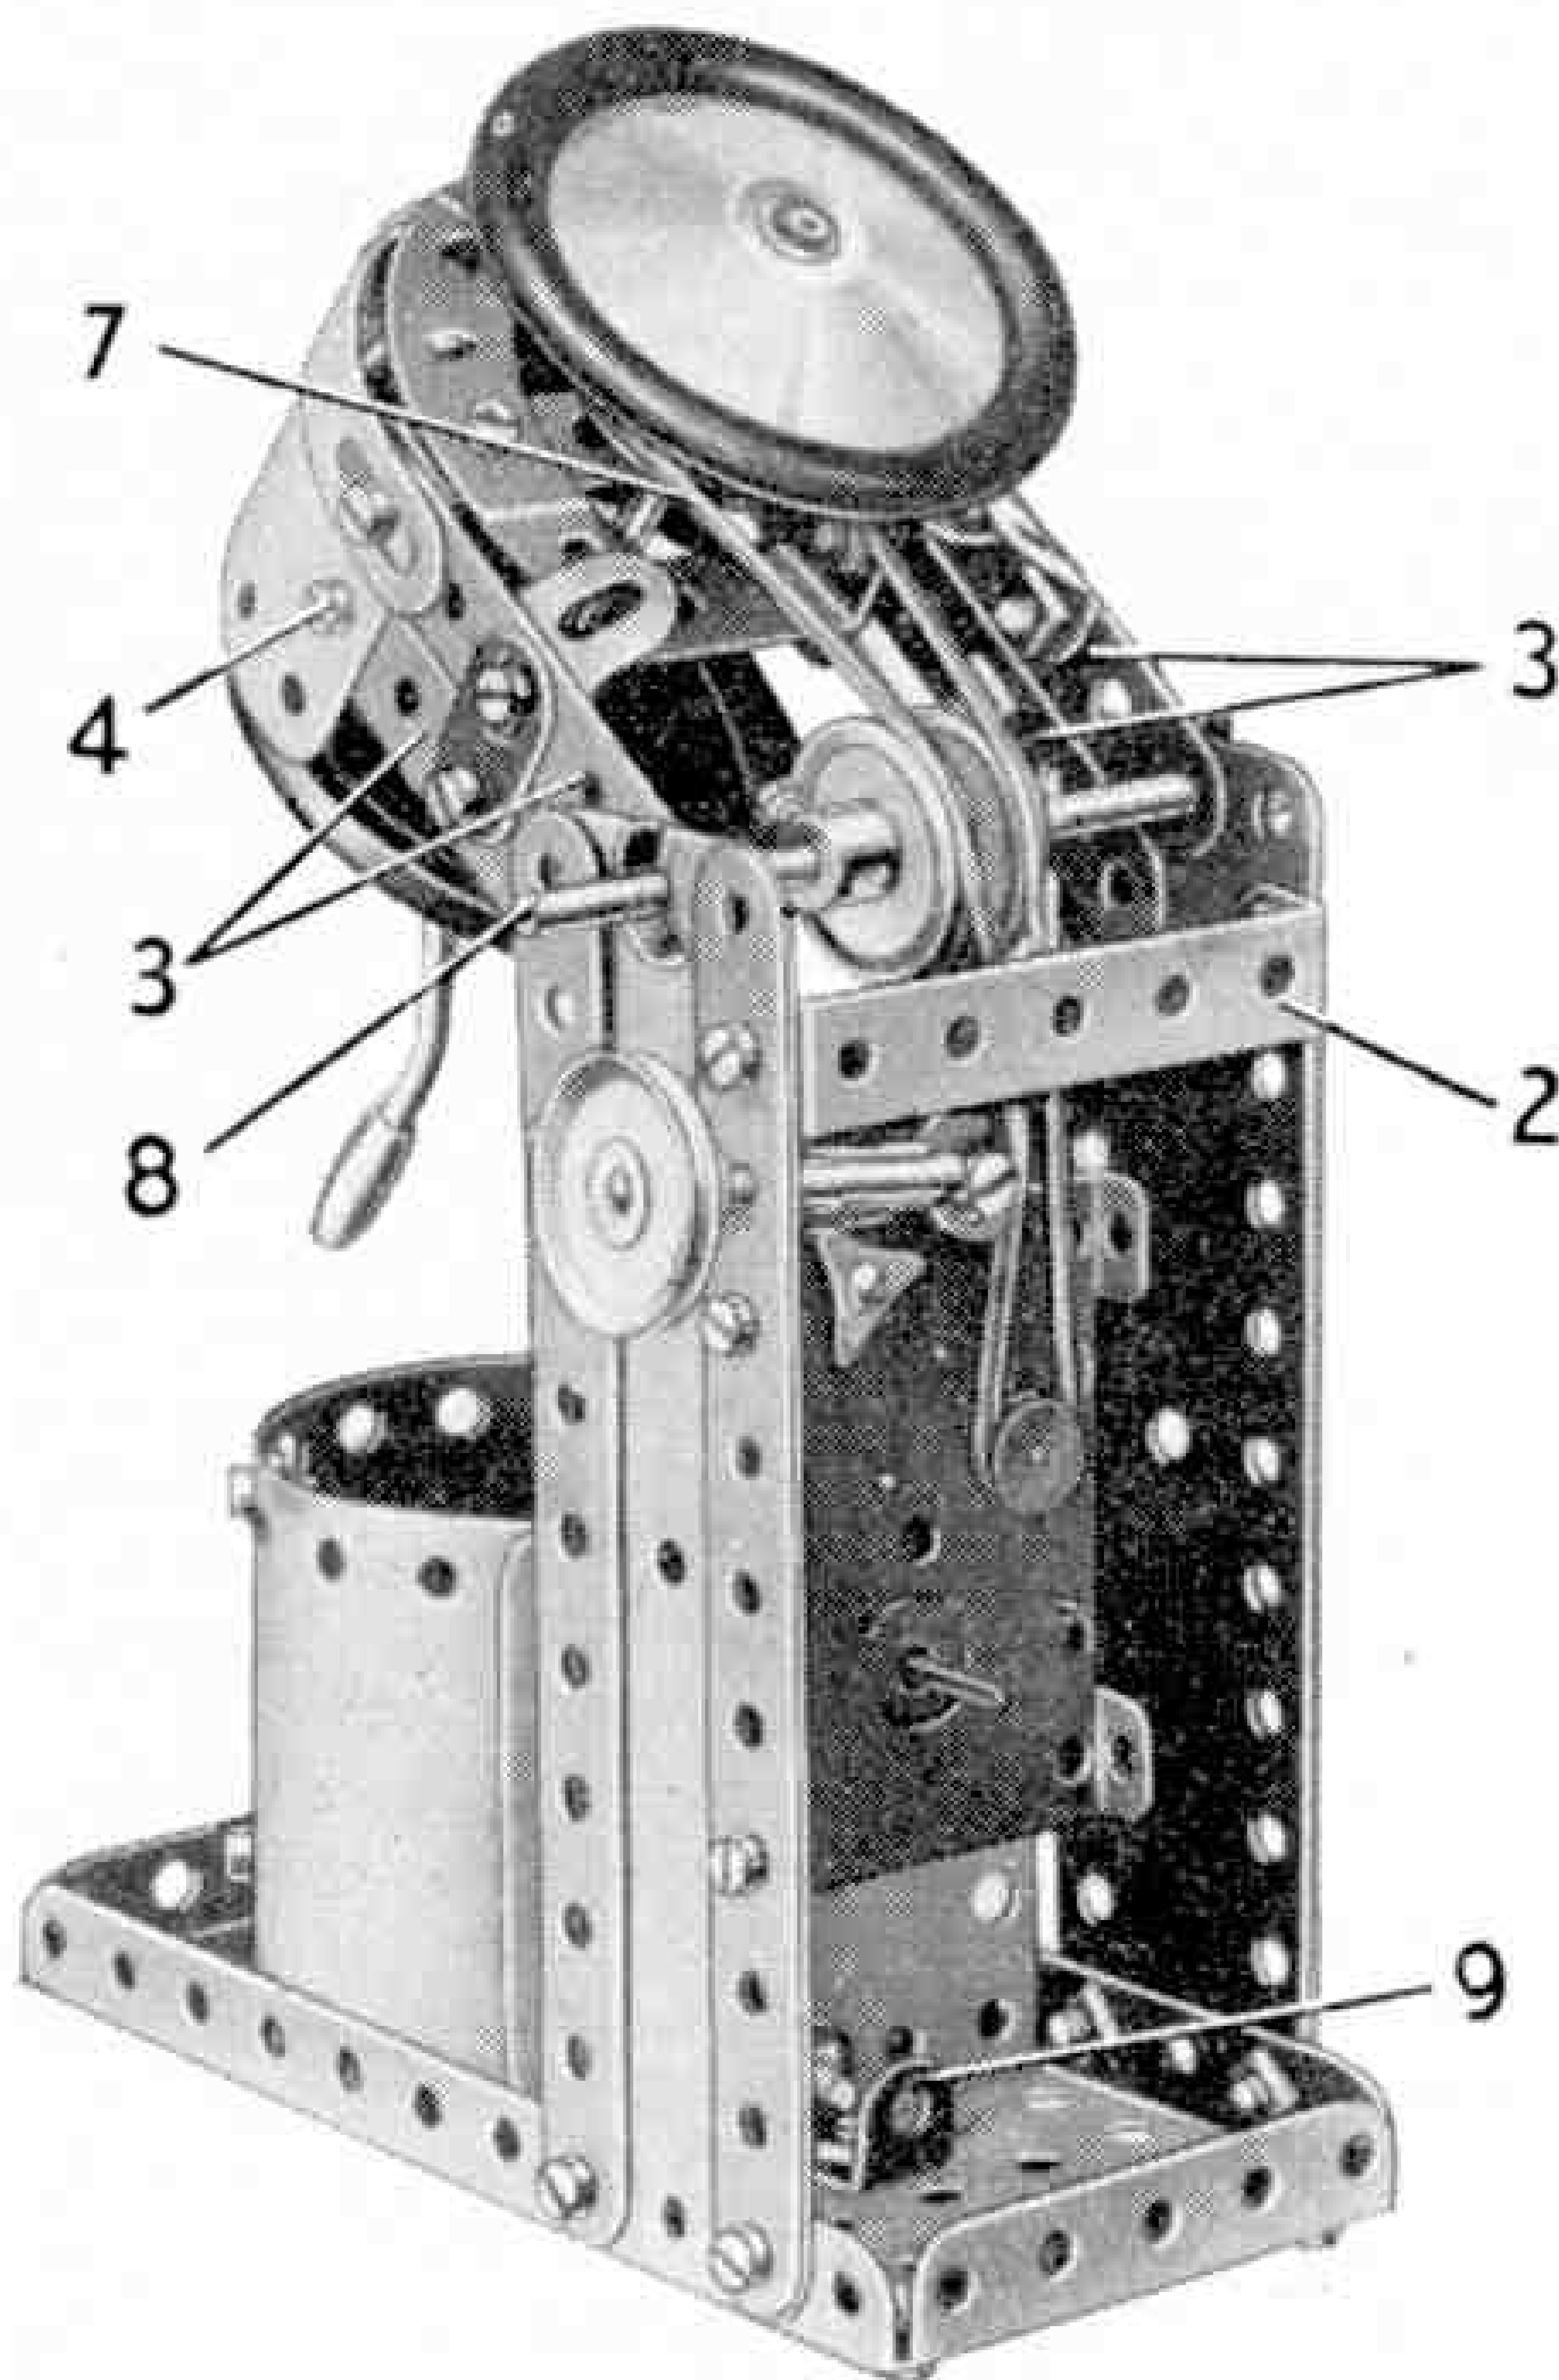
A back view of the Mixing Machine showing how the *Magic* Motor is fitted and the drive to the stirrer.
